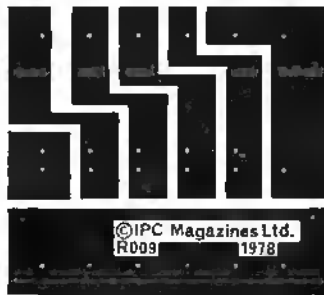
Copper track layout for Board 3. Fig. 8: (Below) Component placement drawing for Board 3
